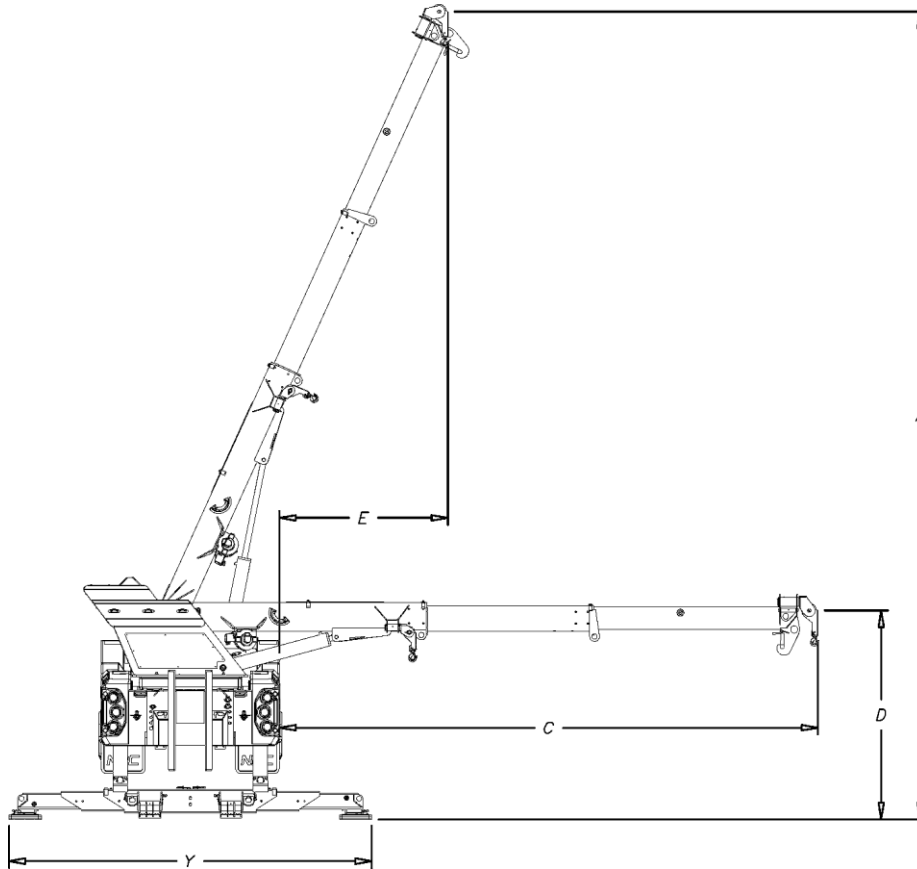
Dimensions of the Boom and Outriggers—Rear View
